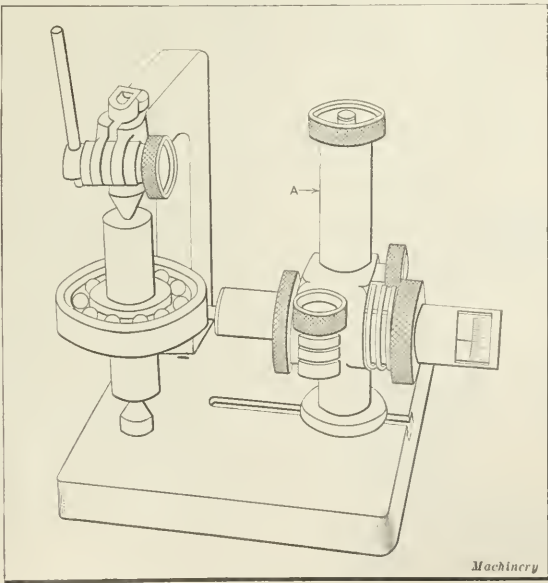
Special Inspecting Fixture for testing Side Wobble and Concentricity of Assembled Ball Bearings
